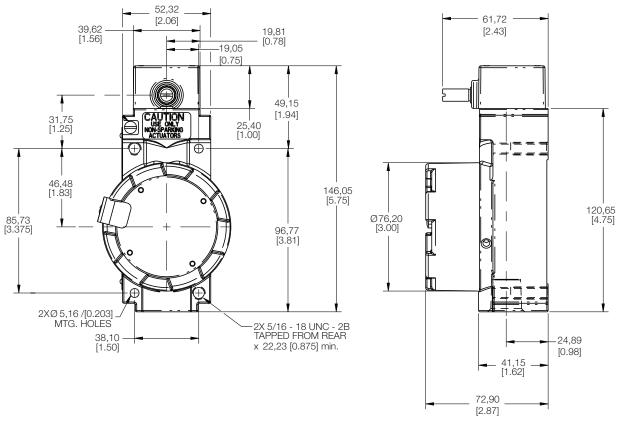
MICRO SWITCH BX2 Series Top Plunger Product Dimensions • mm [in] Top Plunger - Head Codes: C and D
